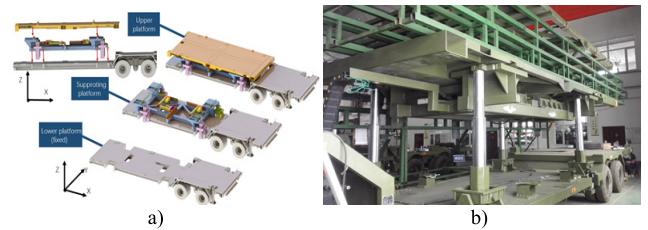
Graphic model of automated assembly system. a) 3D model of the novel mechanism. b) Physical device in operation.
